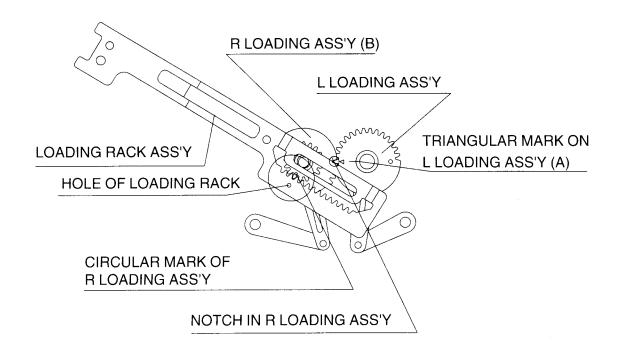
DATUM POSITION OF LOADING RACK ASS'Y & R/L LOADING LEVER ASS'YS
